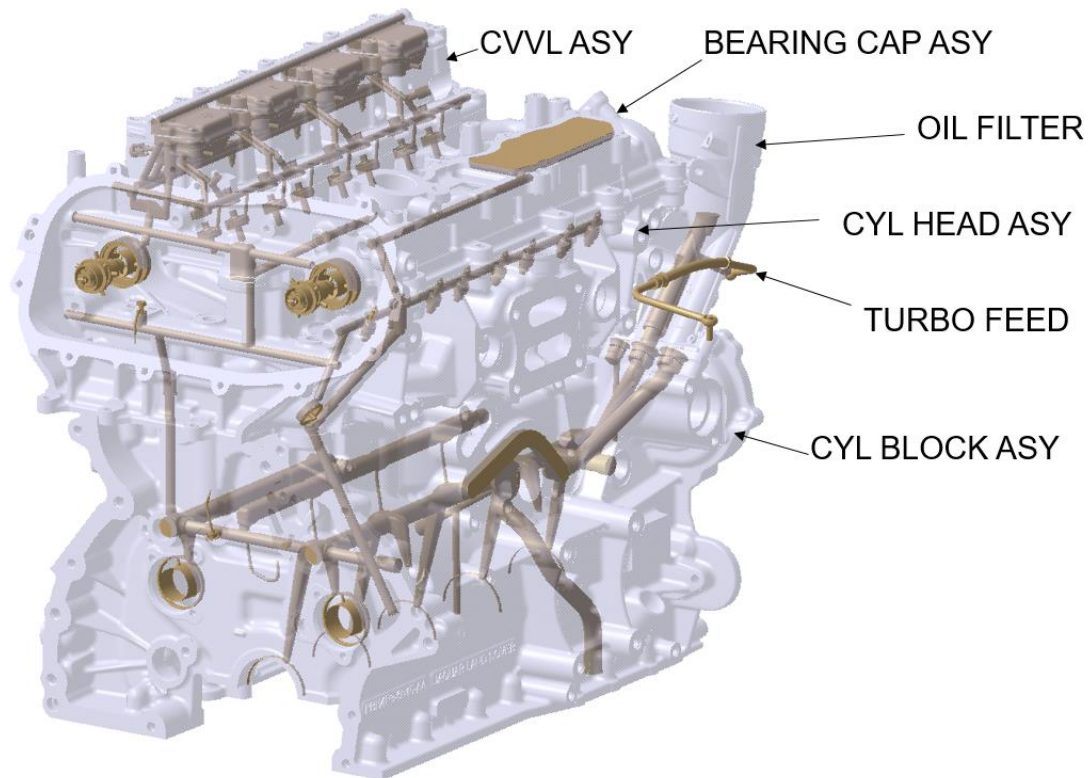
AJ200 PETROL ENGINE OIL PATH
